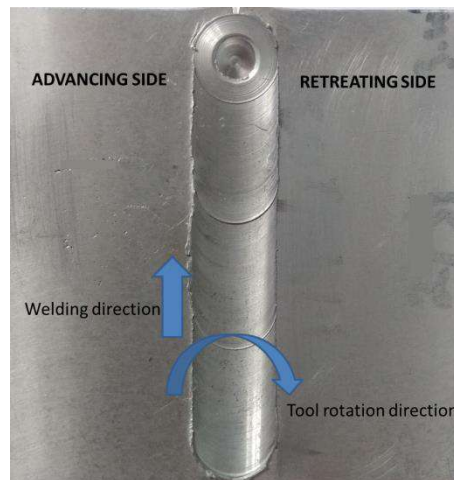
Friction stir welded AA6061-3(wt%)rutile composite specimen
